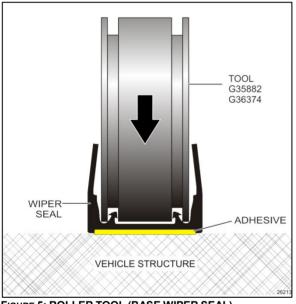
ROLLER TOOL (BASE WIPER SEAL)
